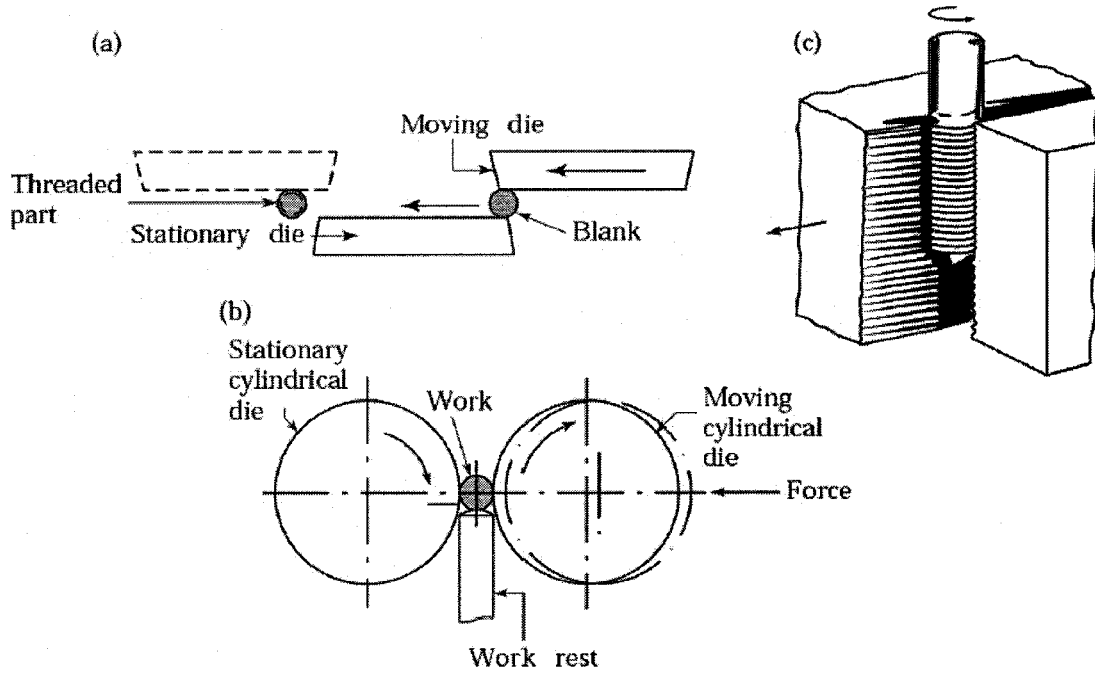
Thread-rolling processes: (a) and (c) reciprocating flat dies;
